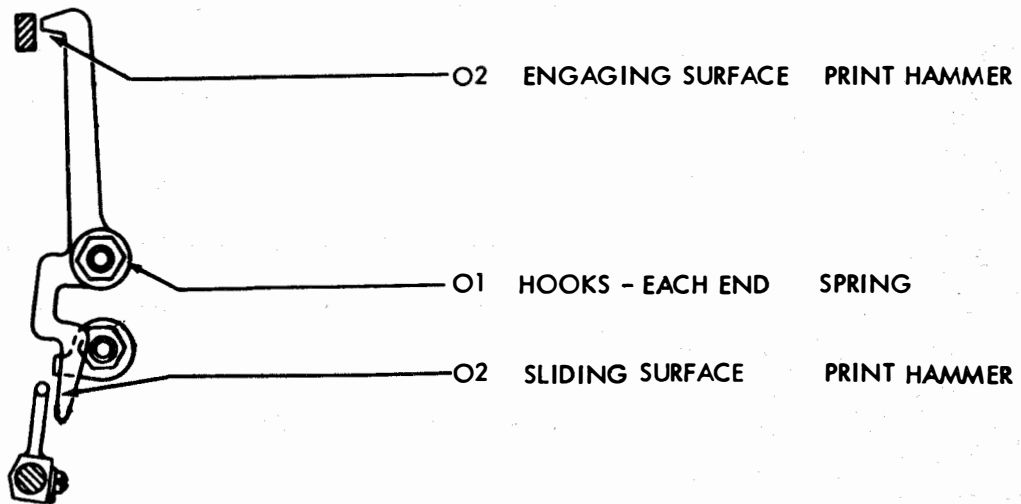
Print Hammer Sliding Surface and Function Blade on BLANK Delete Mechanism
